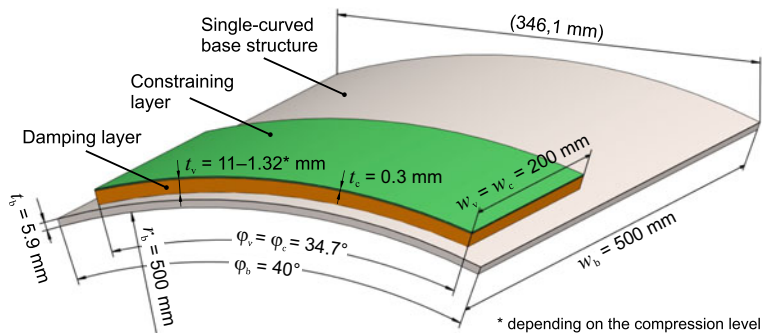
Schematic drawing of the CCLD setup on a single-curved structure
